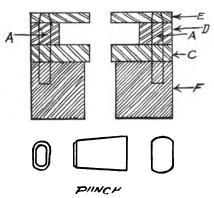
THE DIE AND PUNCH FOR CUTTING THE OPENING IN THE WRENCH END
